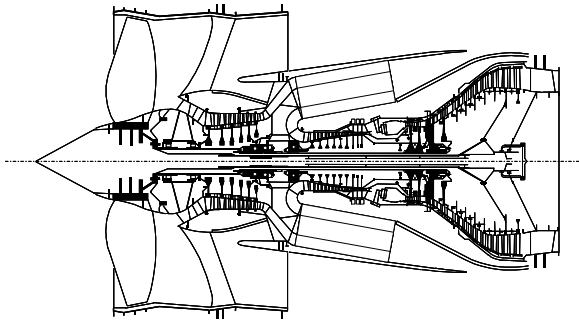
Typical Intercooled 3-Shaft Engine with Direct Drive Fan
